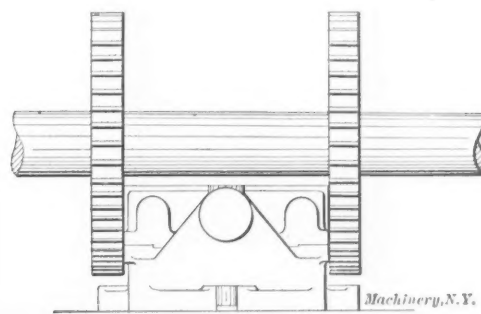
Finishing the Sides of Base and Movable Jaw.
